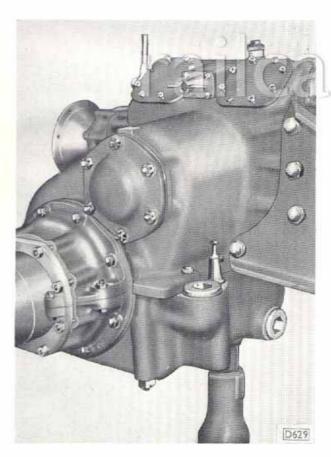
Method of supporting bottom half of final drive casing whilst removing torque arm.
